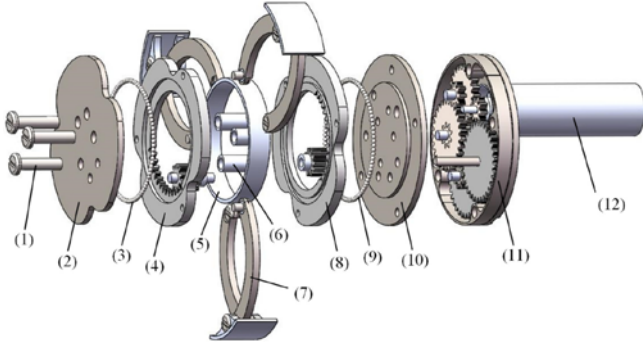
Exploded view of the RMM: (1) screw set to fix baffle 2 and baffle 10; (2) baffle; (3) balls between baffle 2 and annular gear 4 for friction reduction; (4) annular gear; (5) cylindrical ring between annular gear 4 and annular gear 8 to fix their axial location; (6) sleeve set between baffle 2 and baffle 10 to fix their axial location; (7) three legs; (8) annular gear; (9) balls between annular gear 8 and baffle 10; (10) baffle; (11) gear reducer; (12) coreless DC motor
